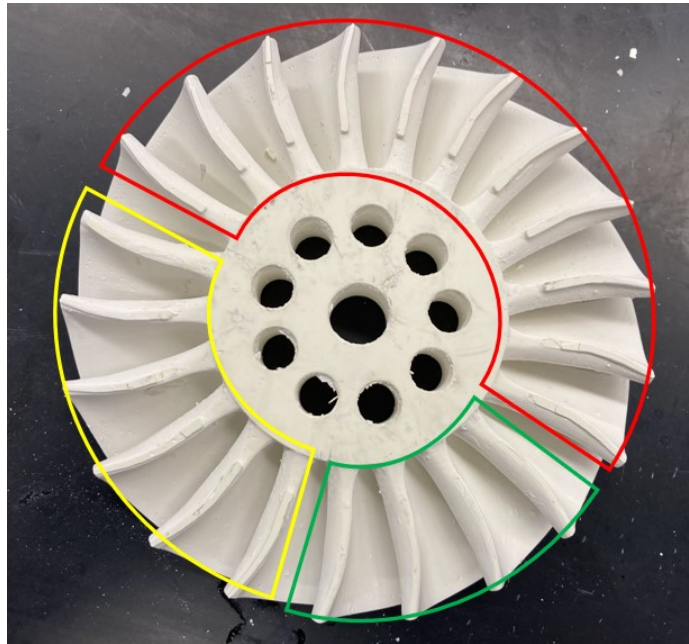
Stages of support removal from the turbine blades: red: original supports, yellow: supports cut off, green: edges sanded.
